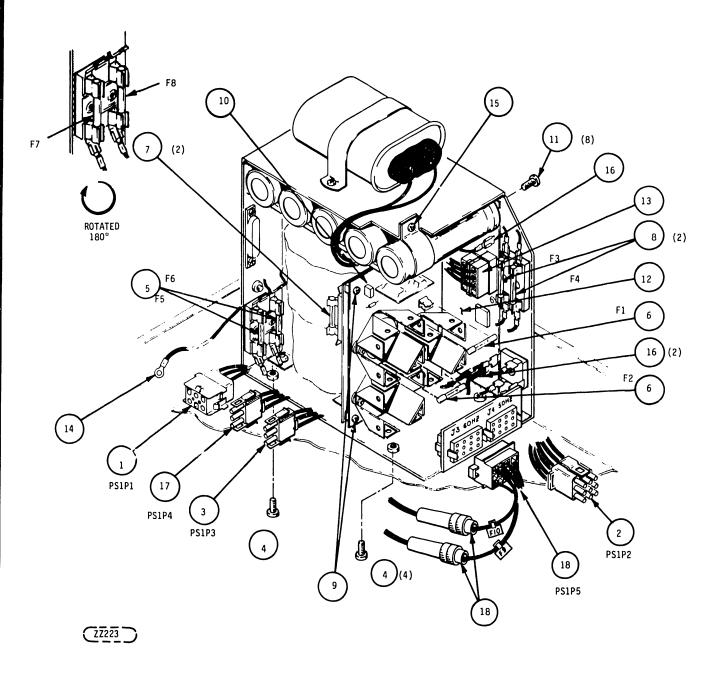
A. 50/60 HZ POWER SUPPLY ASSEMBLY
